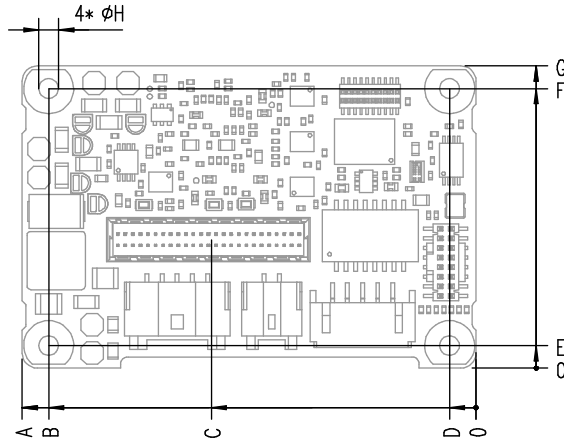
ETK-S21.1 Dimensions - Top View
